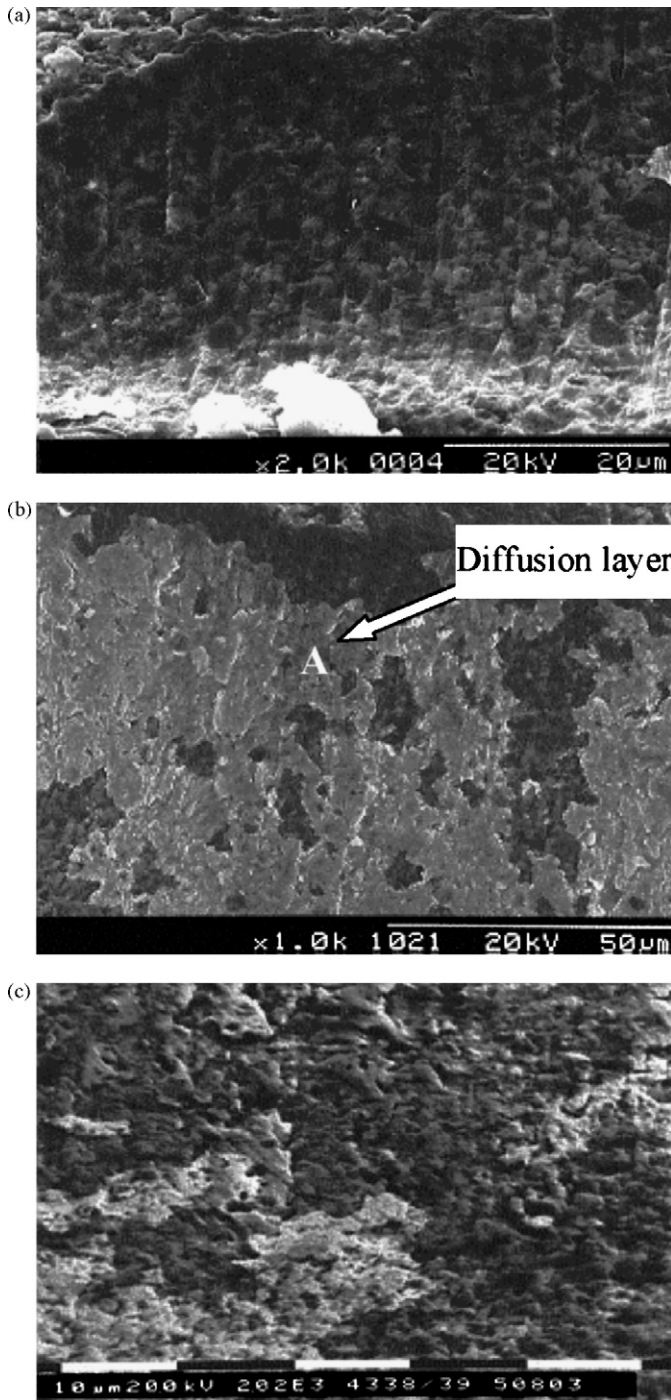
Wear on the rake face for workpiece hardness of HRc 50 under (a)  $V=58$  m/min, (b)  $V=82$  m/min, and (c)  $V=130$  m/min.
